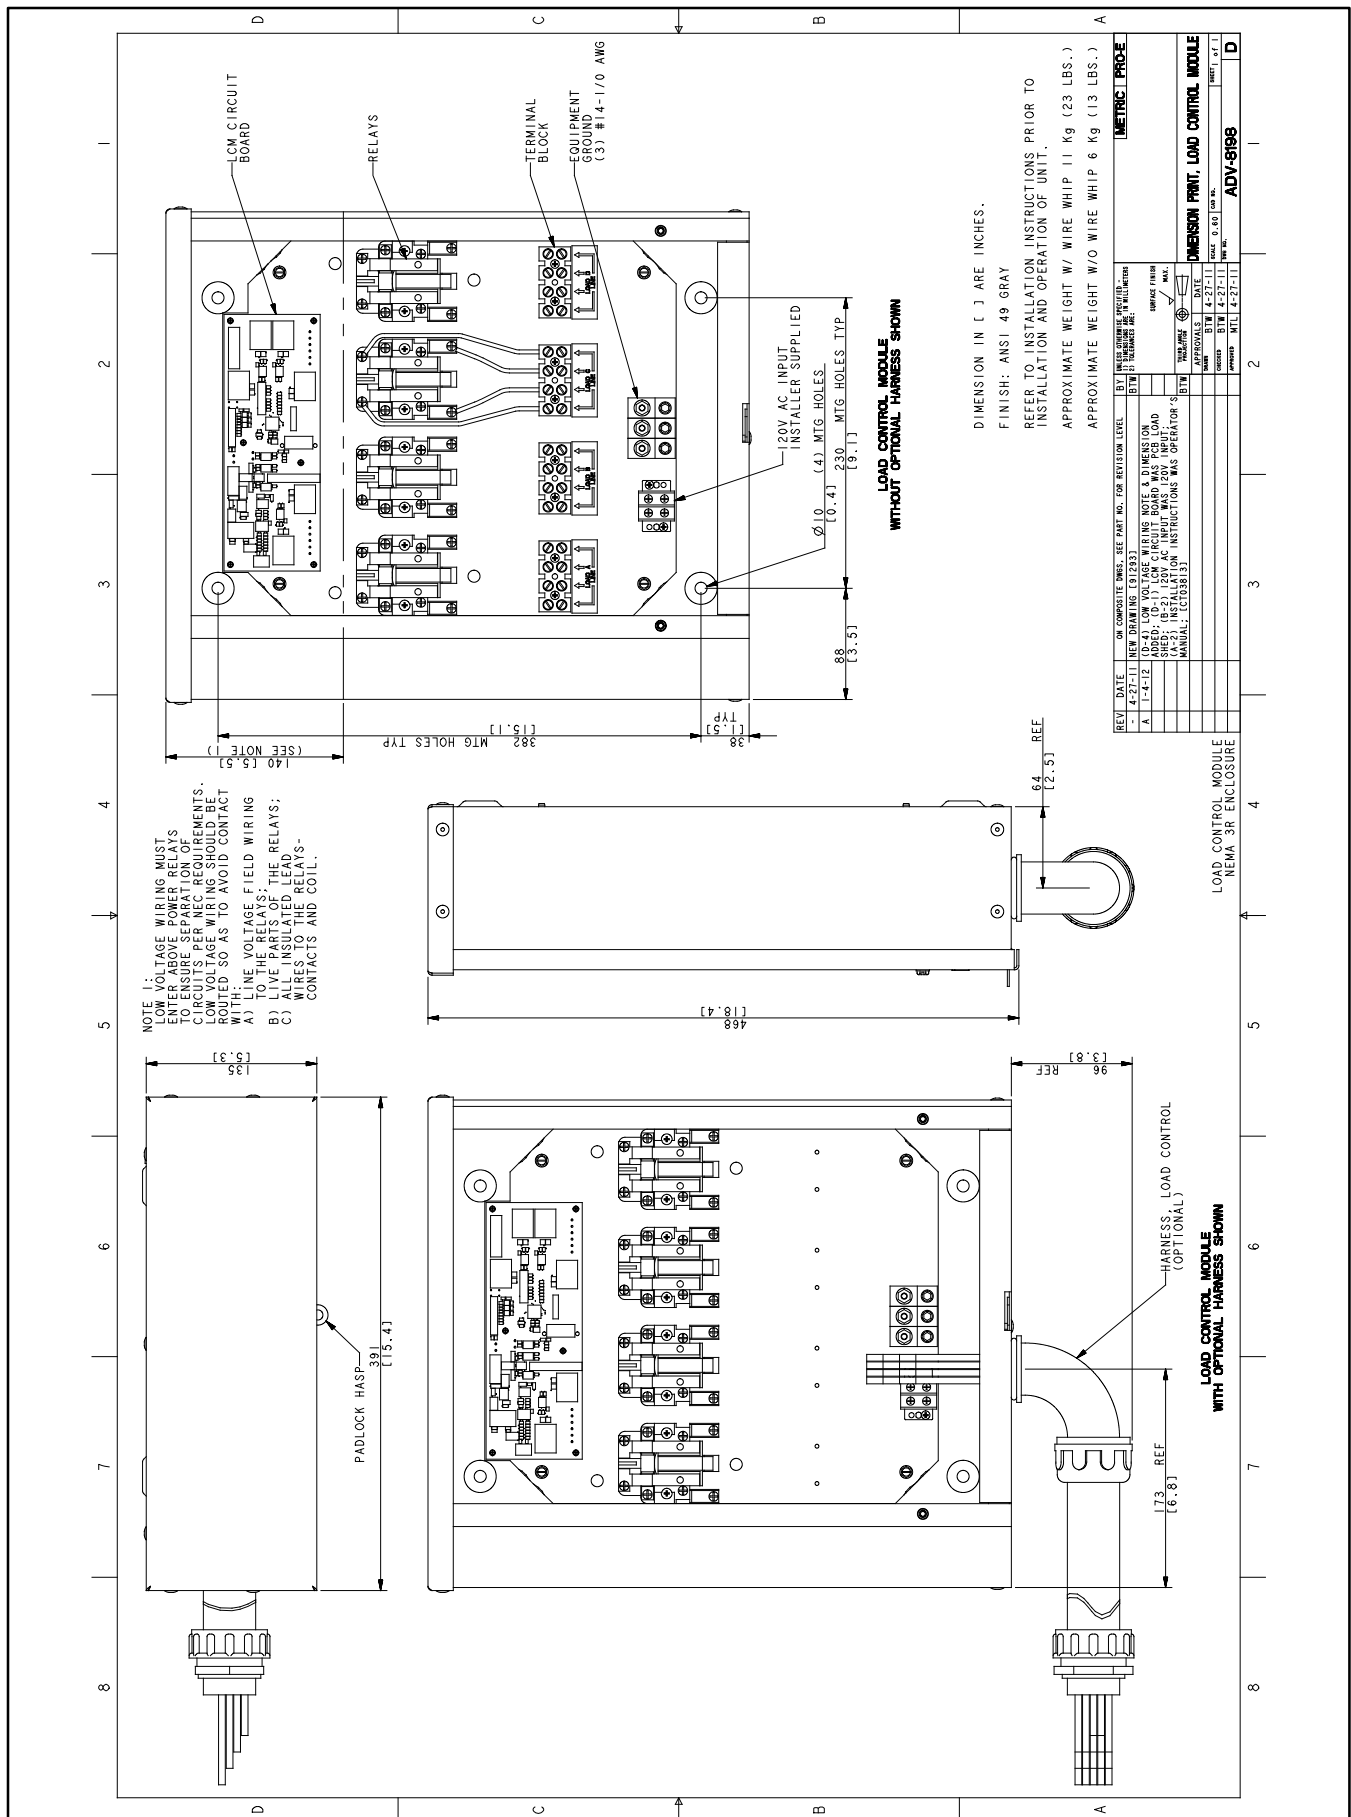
Dimension Drawing, Load Control Modules, ADV-8198-A
